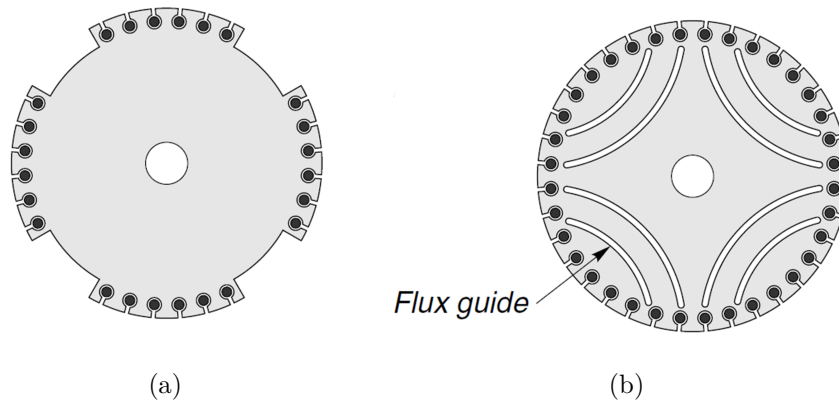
Rotor construction of a synchronous reluctance machine: (a) Salient pole type; (b) Flux guided shape (Hughes, 2006).
